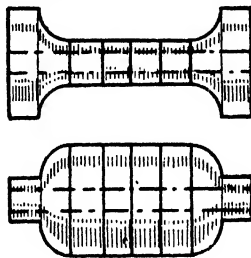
SINGLE-SIDED WHEELS GANGED TO FORM A WIDE PARALLEL MOULDING
